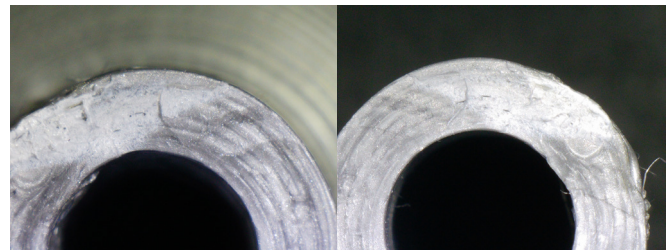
Cross-section mouthpiece ironed w/ 3mm/s + extra path
